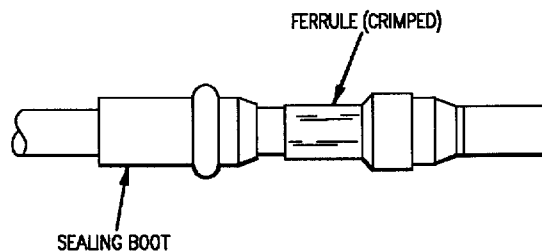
0N089558-2 Coaxial Assembly Procedure (Sheet 2)
